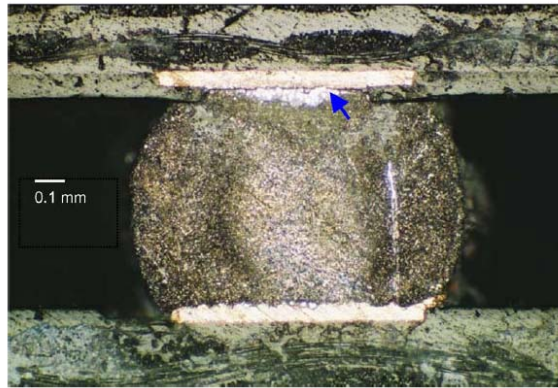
micrograph of solder ball cross-section, with blue arrow showing crack parallel to the solder/nickel interface
